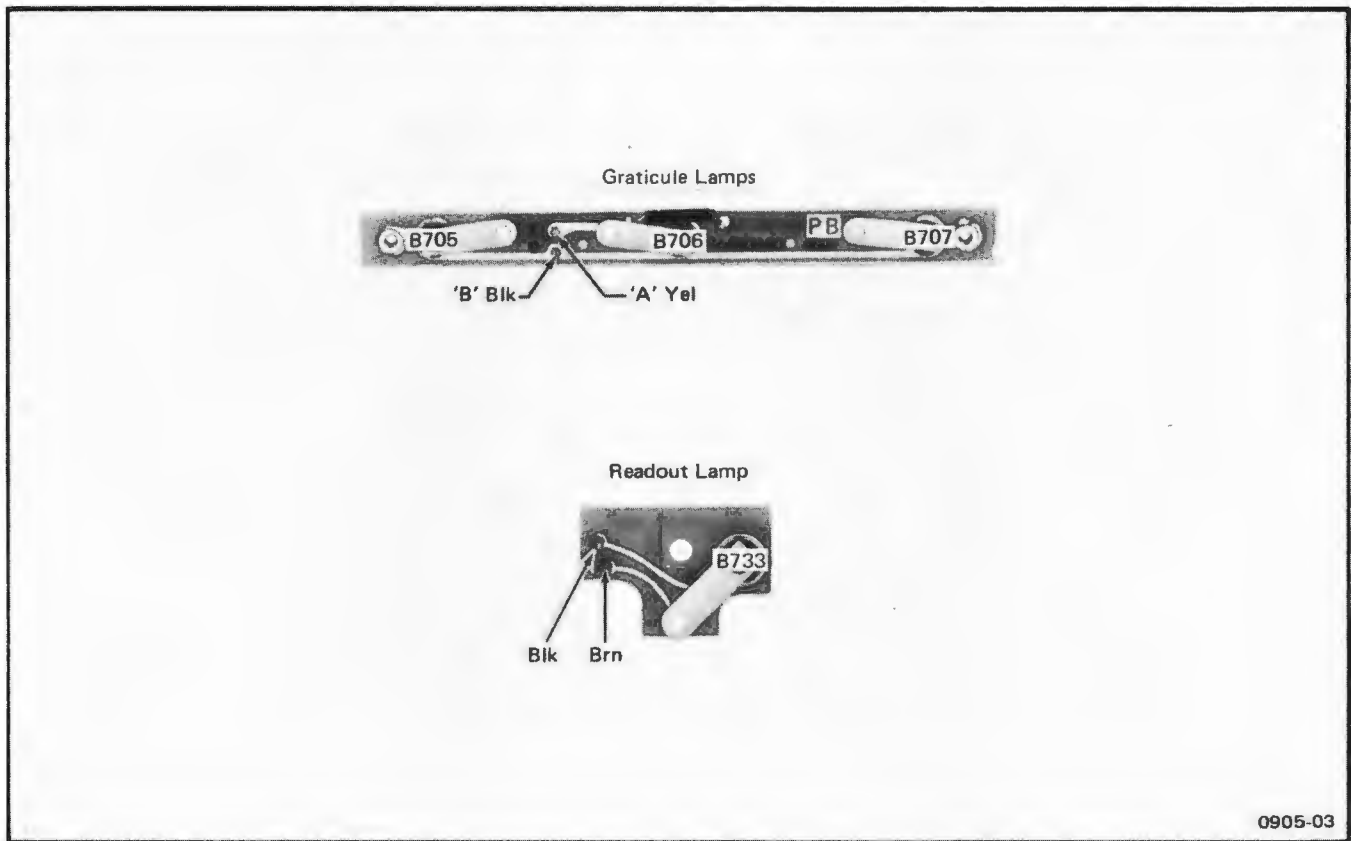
Component locations and wiring color codes on Grat. Lamps and Readout Lamp circuit boards.
